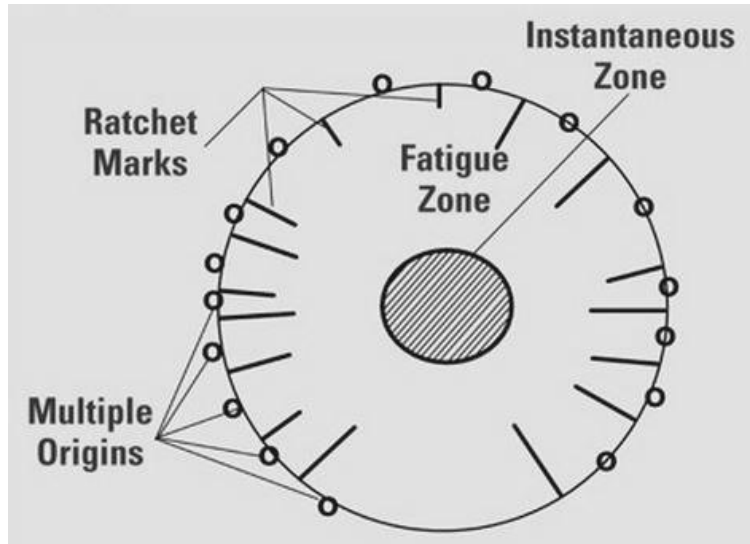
Schematic diagram of rotating bending failure (with a lighter bending load) of shafts showing multiple crack origin <sup>8</sup>
